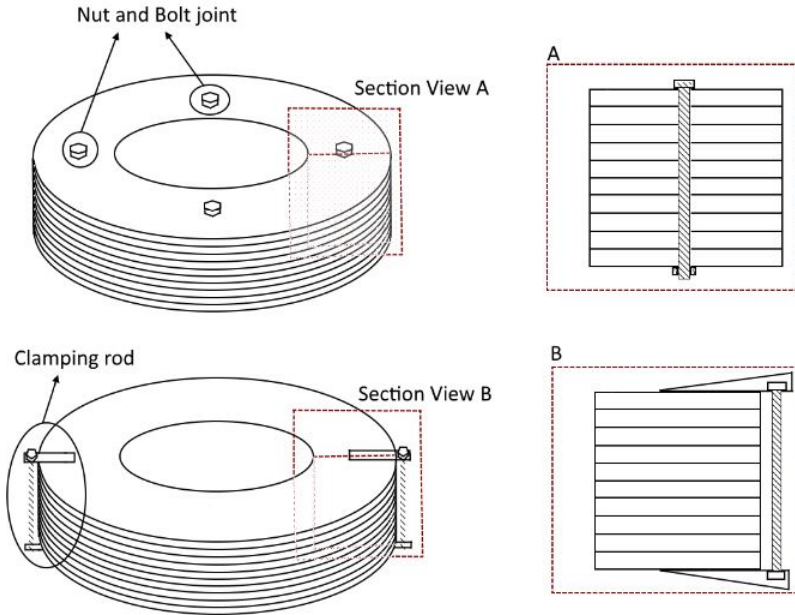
Illustration of a clamped stack of laminations using a nut and bolt mechanism.
